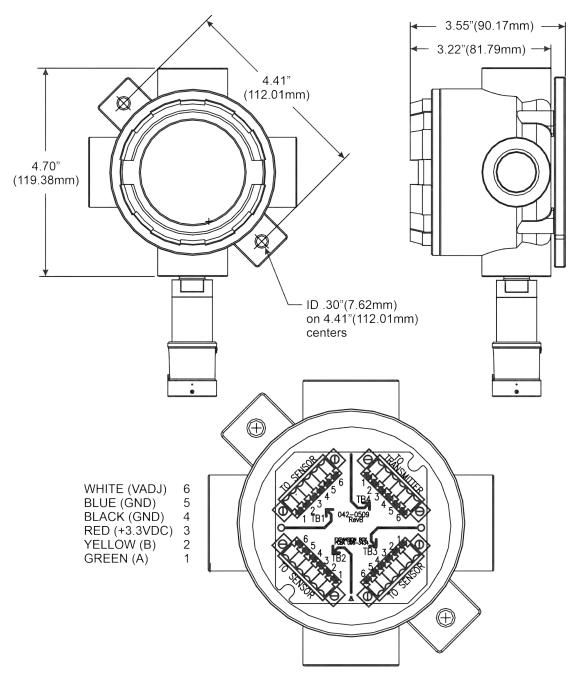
Meridian J-Box Assembly Wiring and Mounting – Aluminum
